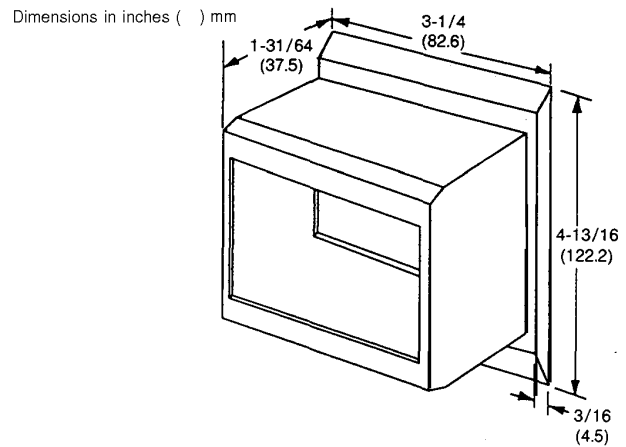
TS-81011 Series Overall Dimensions American Standard Mounting.
